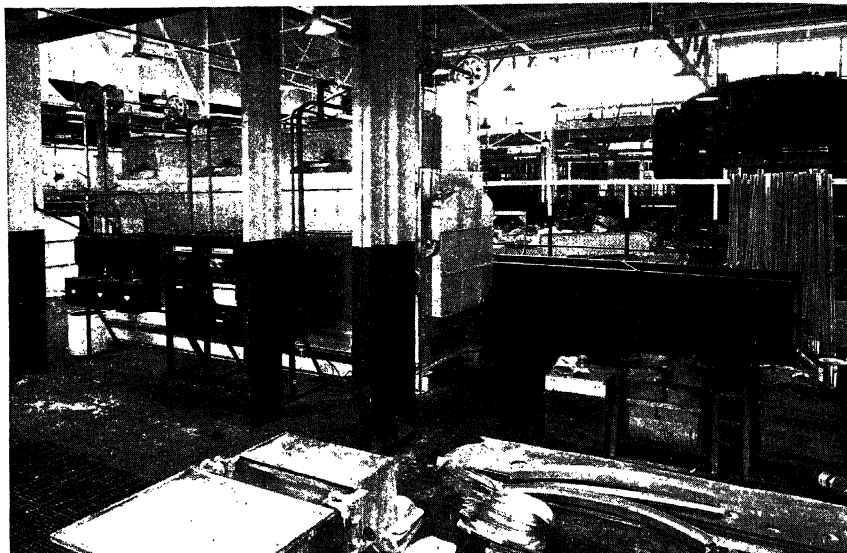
View 1.—General view of air-type heat-treating furnace for aluminum alloy, showing control panel and quench tank.
